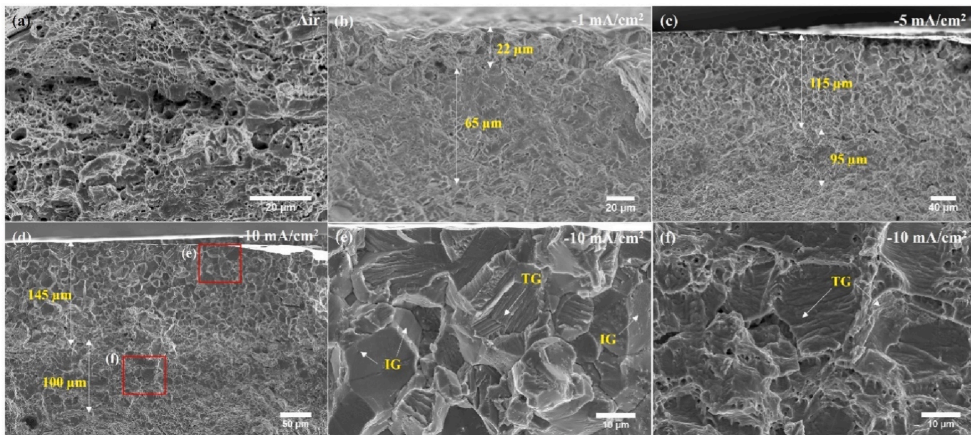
Fracture surfaces of different hydrogen charged samples along with the information about brittle fracture depth. (a) Air. (b) -1 mA/cm^2 (c) -5 mA/cm^2 (d) -10 mA/cm^2 (e, f) Fracture surfaces at the higher magnification for the regions highlighted in (d). (IG: Intergranular features; TG: Transgranular features).
